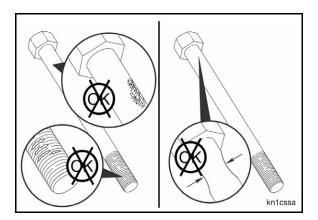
INSPECT THE CYLINDER HEAD CAPSCREWS
